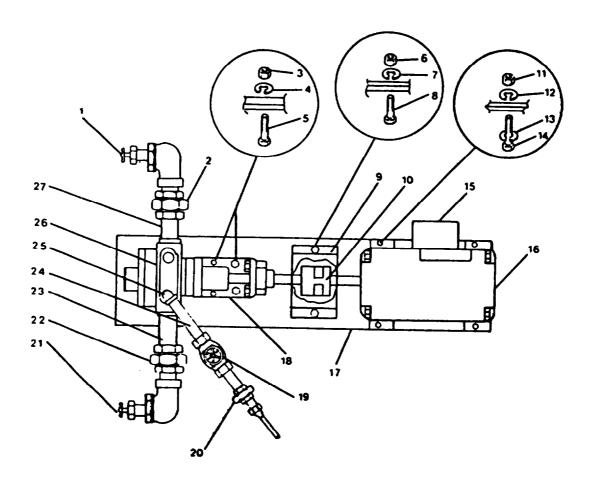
Rotary Pump Unit (Prelube Oil Transfer).
